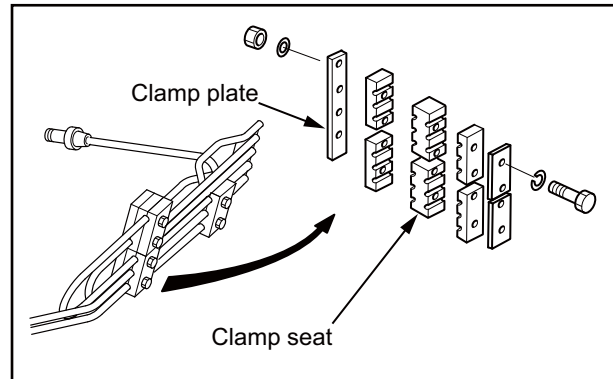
High Pressure Fuel Injection Pipe and Clamp Seat - Inspect and Replace
